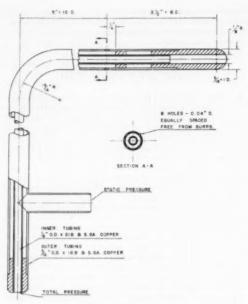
CONSTRUCTION DETAILS OF STANDARD PITOT TUBE FOR USE IN FLY-ASH TESTING EQUIPMENT
